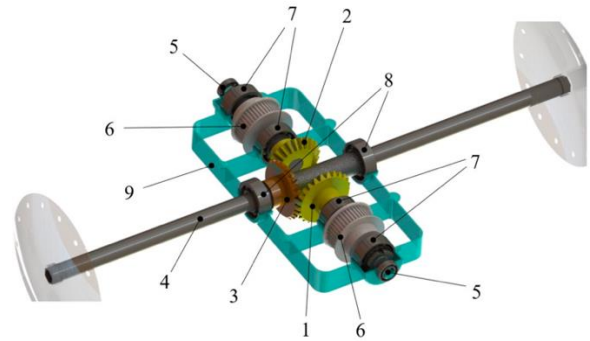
Design solution of the differential gear. 1)-2) Sun gears; 3) Planet gear; 4) Main rover shaft; 5) Steer shaft; 6) Pulley; 7) Steer shaft bearing; 8) Drive shaft bearing; 9) Chassis.
